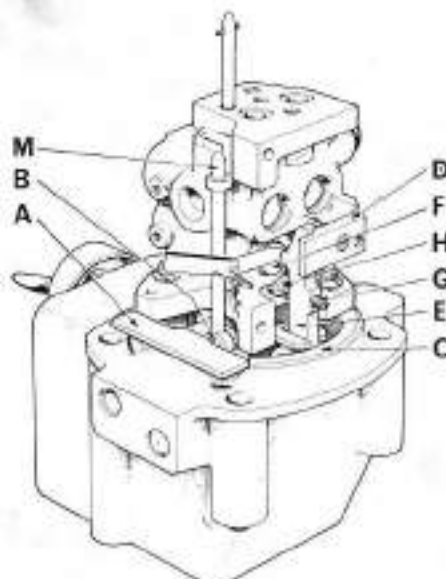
Using adjusting gage to check setting of abutment plate (D); refer to text for procedure.
